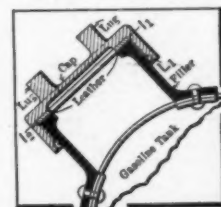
Section of a filler on a gasoline tank showing how to make the same so that it will pack tight against pressure
